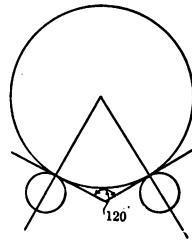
Proper angles for rollers on tire-mounted tube mill.
